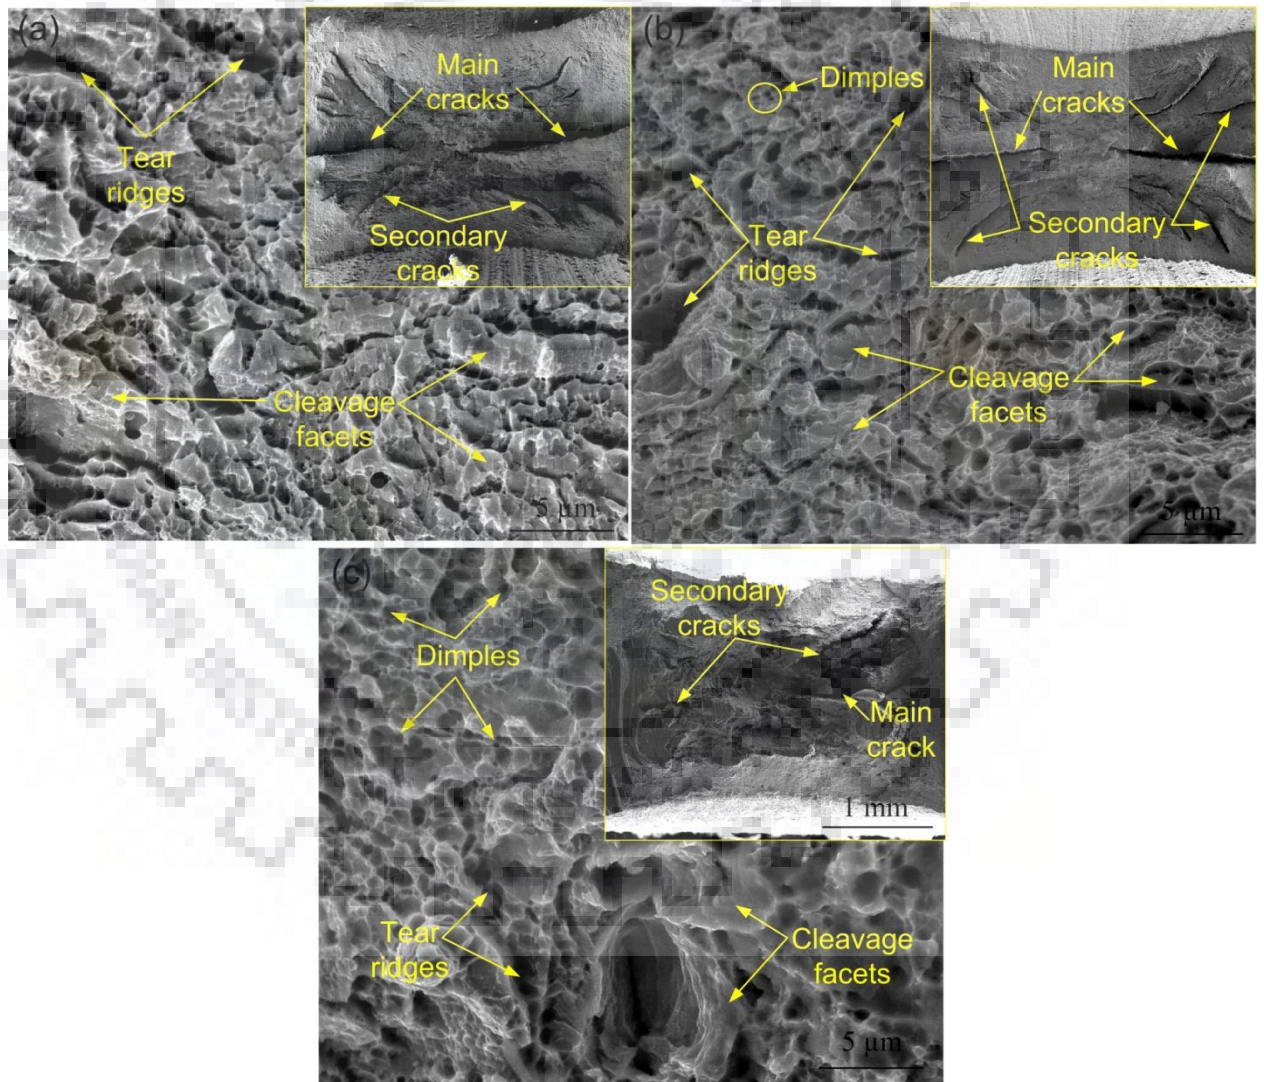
Fractographs after room temperature static tensile testing for different condition (a) as-welded, (b) PWHT, (c) N&T
